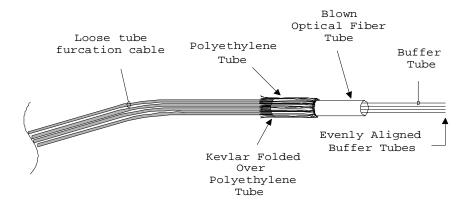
E1-3. Furcation cables joined to the BOF tube.
